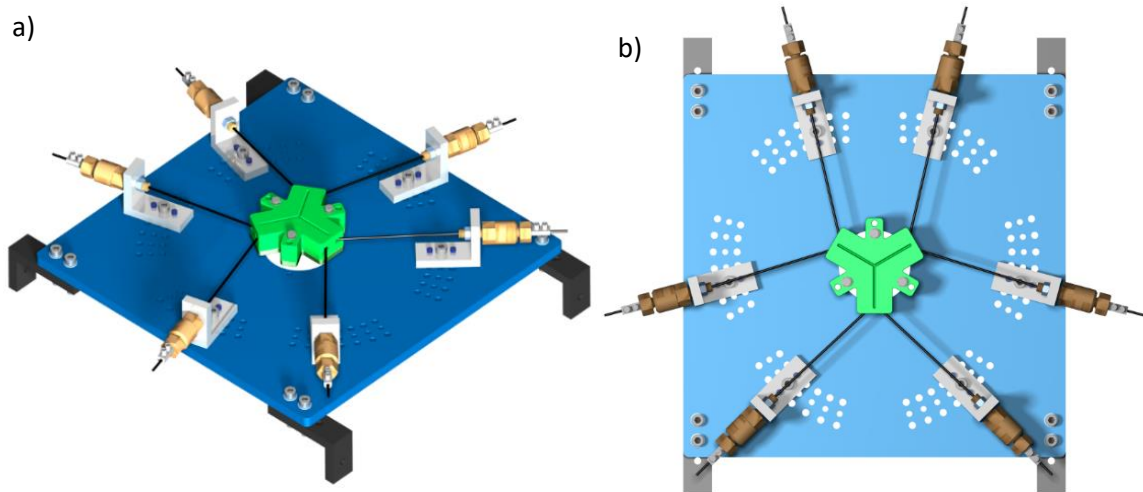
CAD of the final prototype: (a) Isometric view of the mechanism. (b) Top view of the mechanism.
